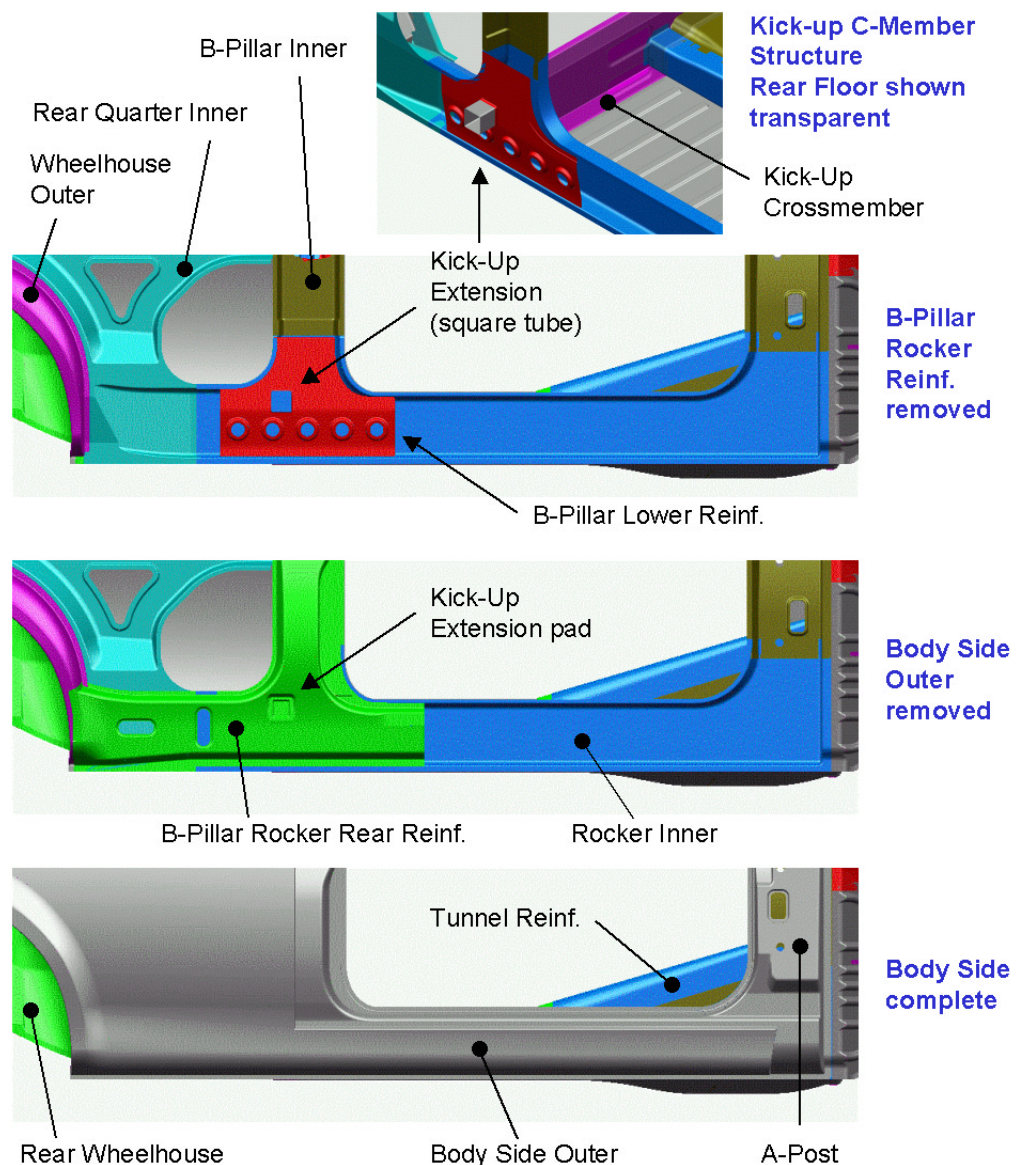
Rocker with front seat rear crossmember PNGV-Class
